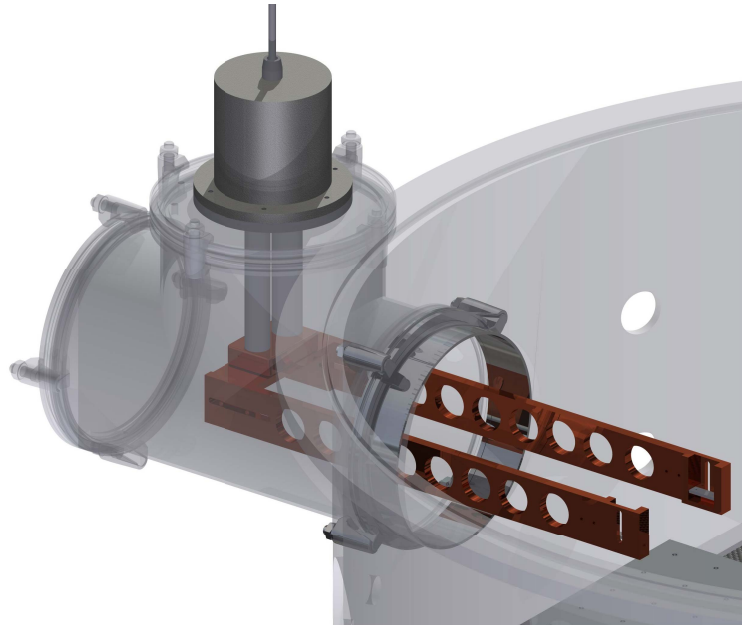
Pulse tube cooler flanged with a T-adaptor and heat pipes mounted to the cold head.
